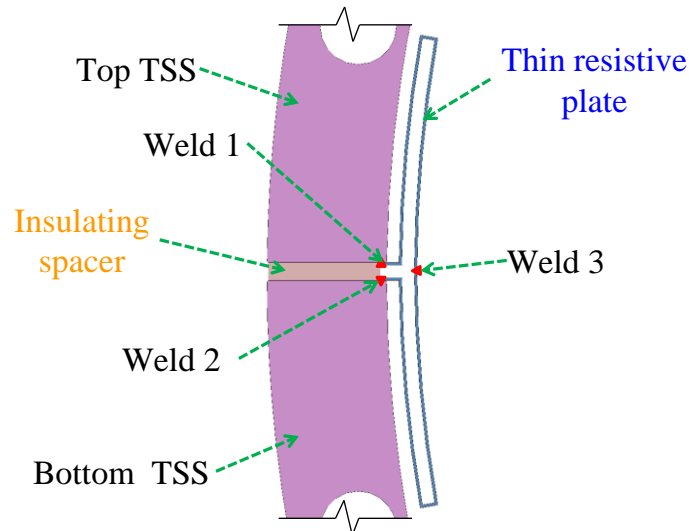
Sectional view of resistive plate vacuum sealing and weld sequence
